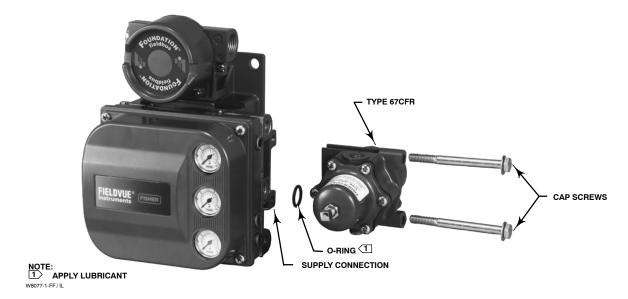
Mounting the Type 67CFR Regulator on a DVC6000f Series Digital Valve Controller
